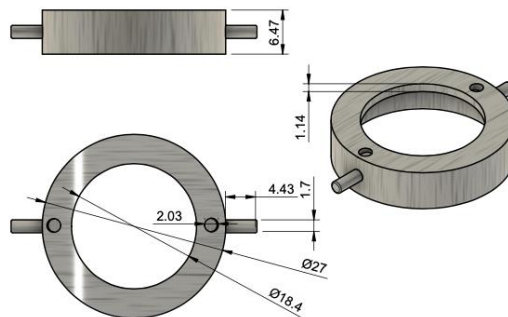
The eyelid bracket CAD model illustrating the design and dimensions.
